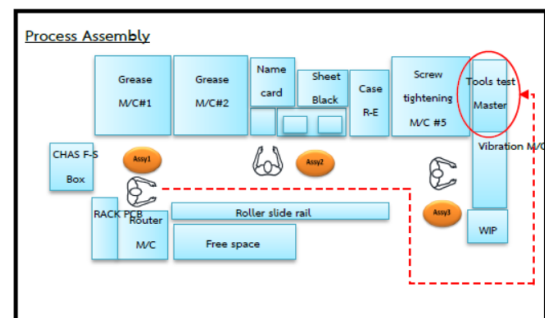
Storage of test master equipment at Assembly 1 (before improvement)
